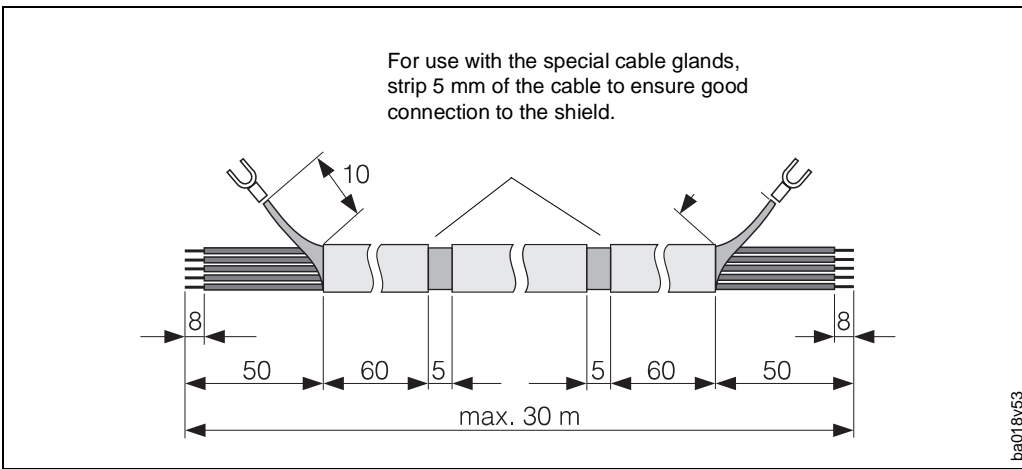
Instructions for stripping the connection cable between remote transmitter and sensor
